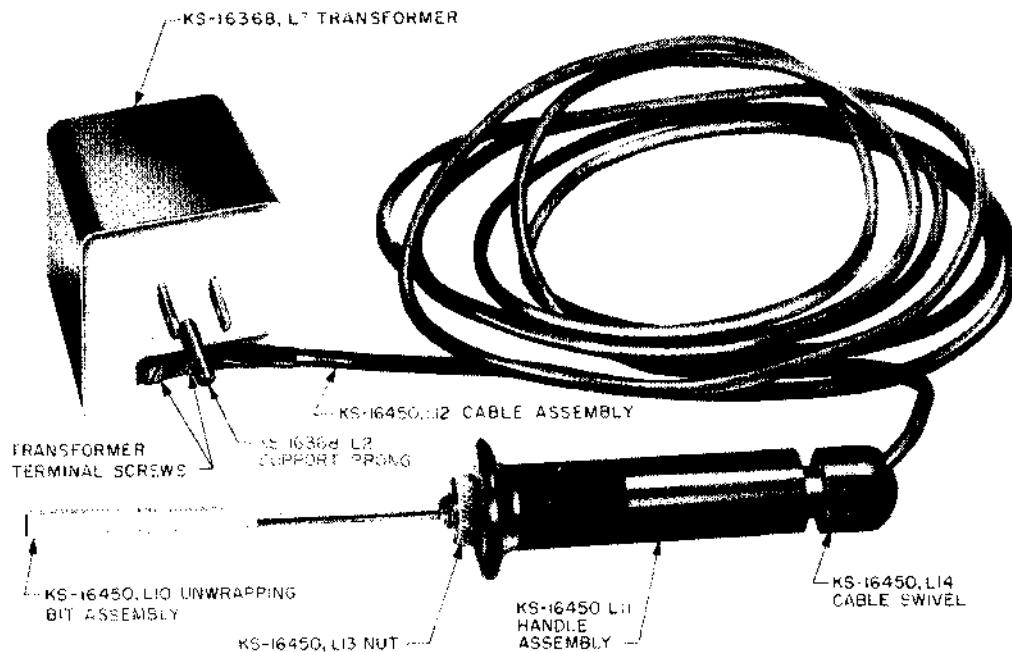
KS-16450 L1 Wire Unwrapping Tool
